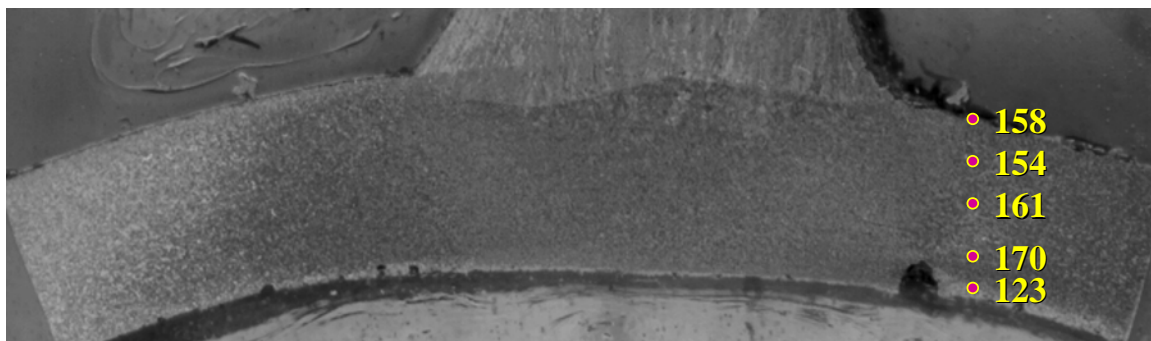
Micrographs showing an etched section of tube #1 with SAC "pits" on the inner tube surface. Pits were near cracks under a longitudinal weld attachment.
